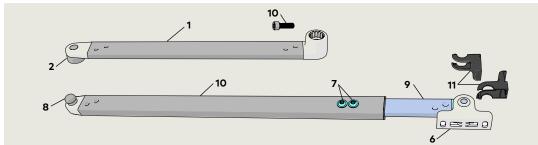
Push arm assembly, 19 11/16" [500]
